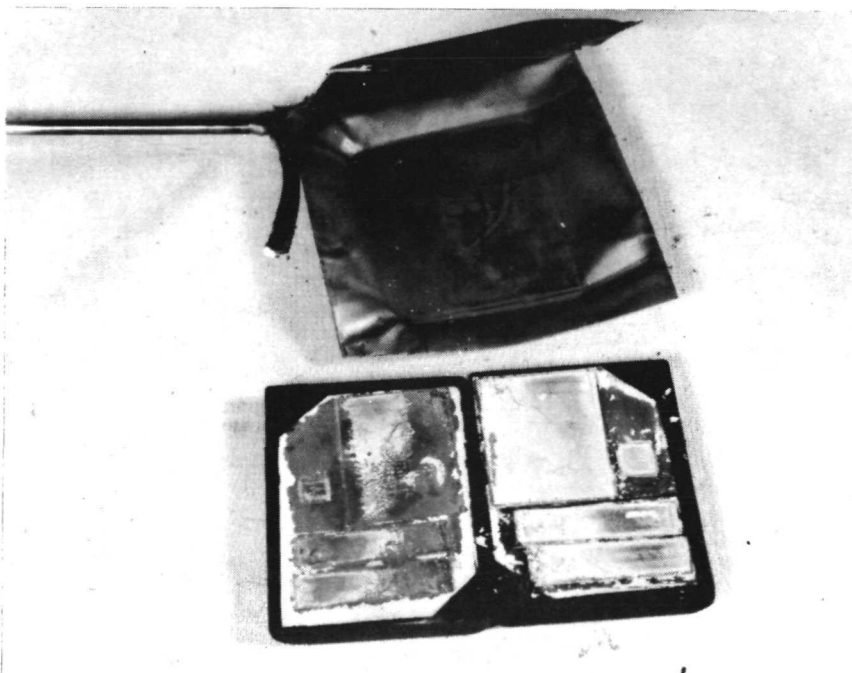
PRESSURE PLATES OPENED TO EXPOSE BONDED SPECIMENS (ON RIGHT) AND GLIDE SHEETS
